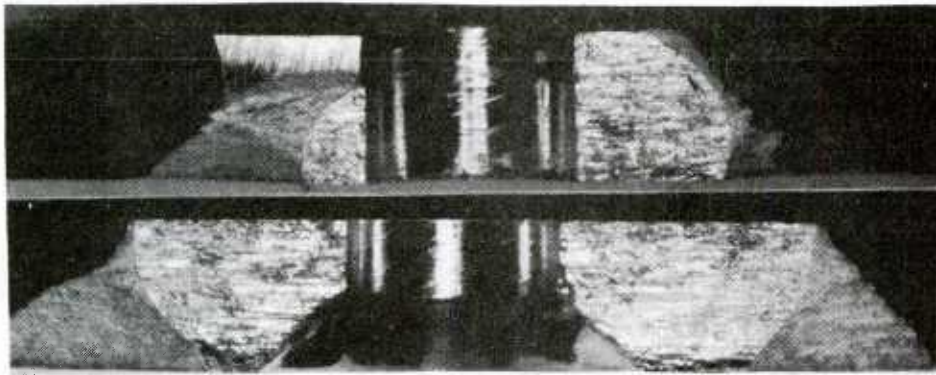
Typical Fatigue Crack Origins in No-Load Transfer Specimen
